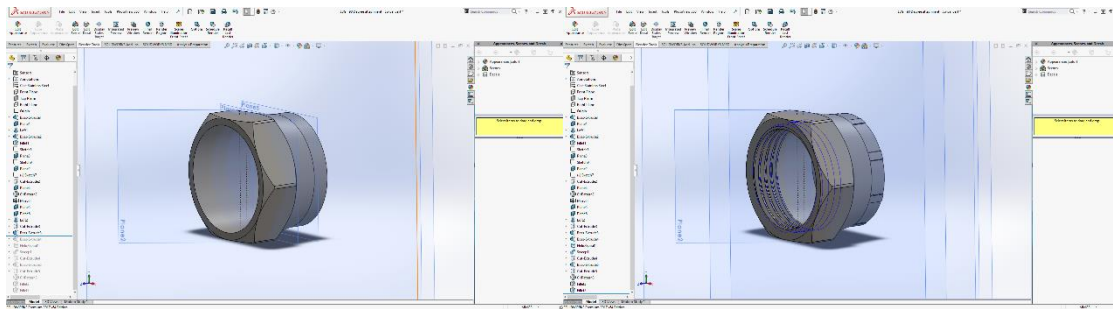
AC901616: CAD Drawing (Stages 7 & 8)
